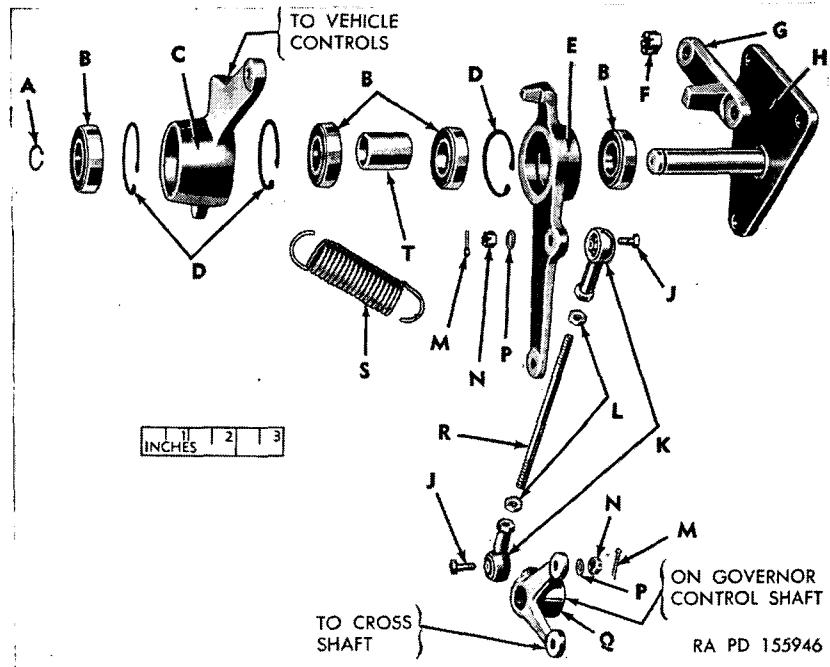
Throttle linkage—cross shaft assembly—exploded view.
